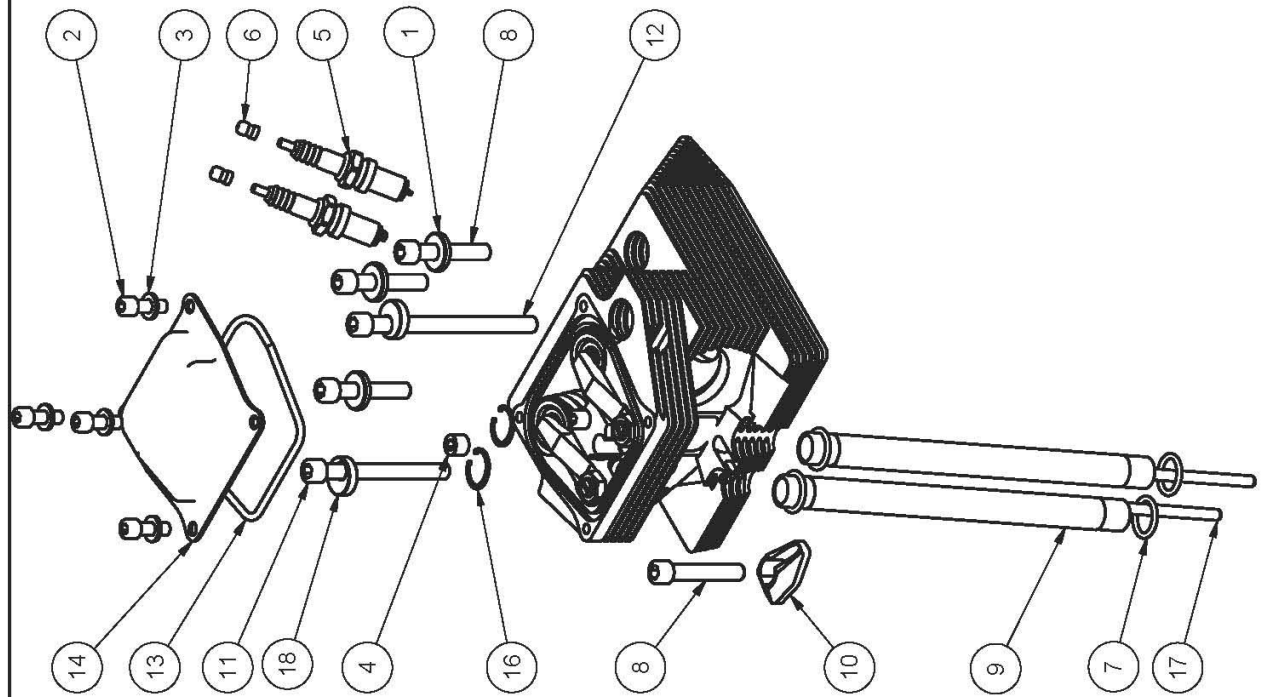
Head Mounting & Pushrod Assembly to S/N 33
